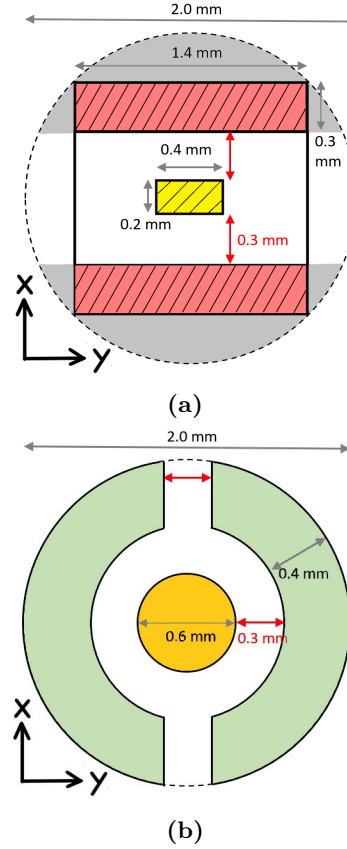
Initial planar bending design cross-sections. a) bending mechanism cross-section, with bending flexures in pink, grasping rod in yellow, potential expansion of bending flexures in grey, minimum clearance in red. b) shaft cross-section, with bending rods in green and grasping rod in orange.
